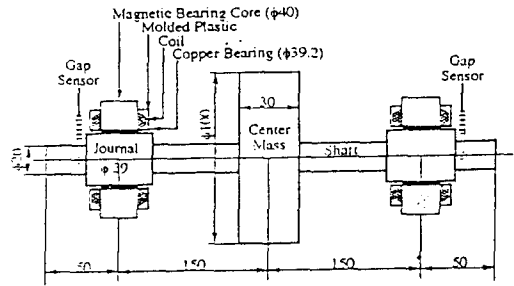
Configuration of rotor system supported by hybrid bearing.
